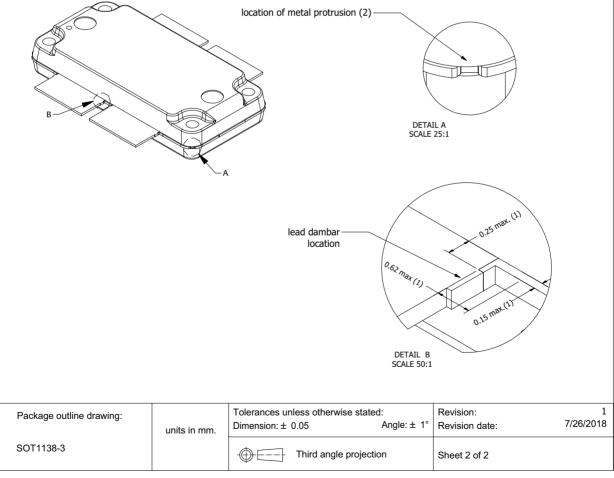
Package outline SOT1138-3 (sheet 2 of 2)
